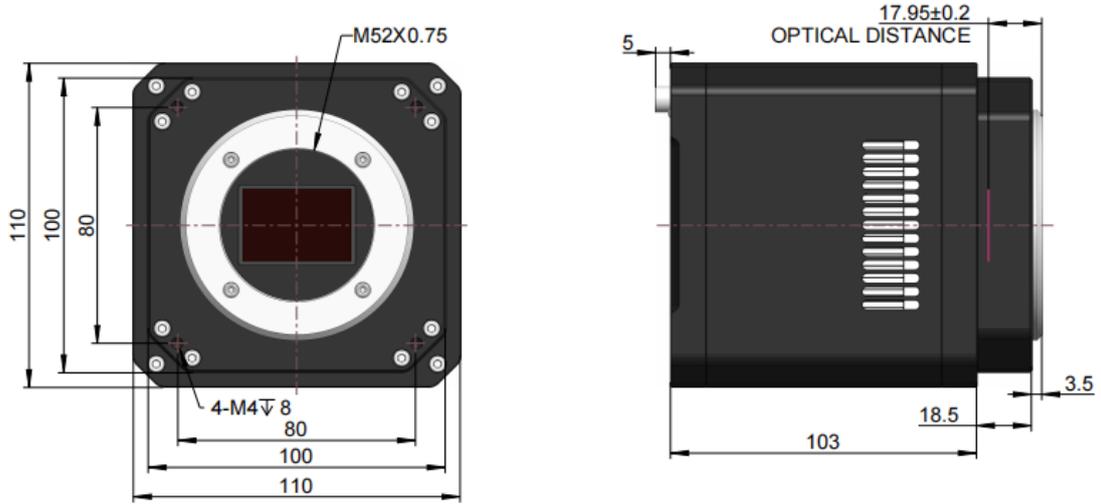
MaxCam-455M/C-TE& MaxCam-410C-TR dimensions (mm)
